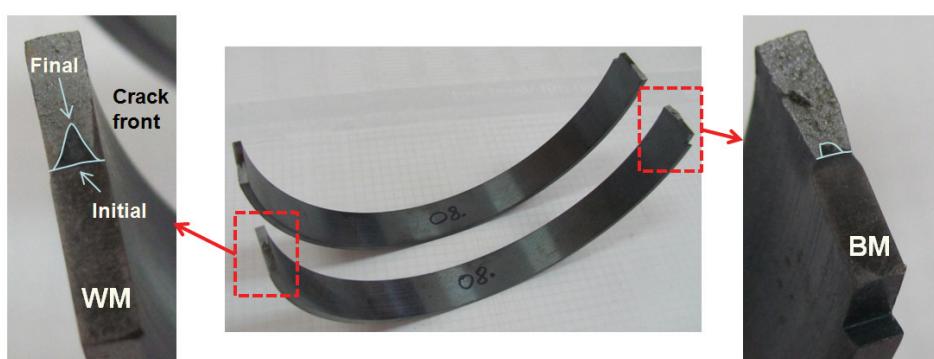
Fractured ring specimen PRNB8, with enlarged view of fracture surfaces in the welded joint (seam) (WM) and base metal (BM).
